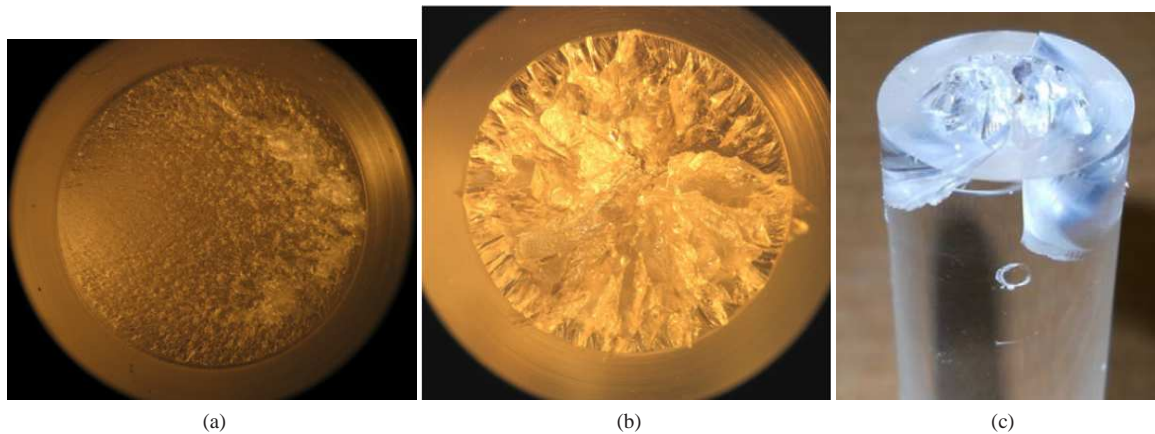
Fracture surfaces of PMMA cylindrical specimens under pure tension (a), and pure torsion (b) from [9], and under pure torsion from [8] (c).
